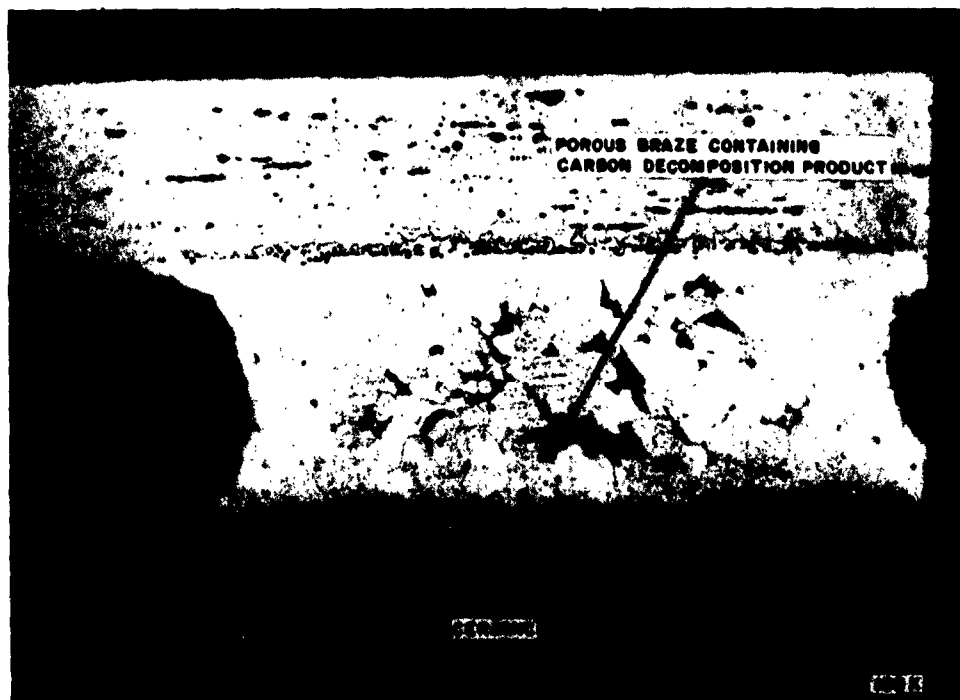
POROUS BRAZE CONTAINING CARBON DECOMPOSITION PRODUCT ON ID SEAL
